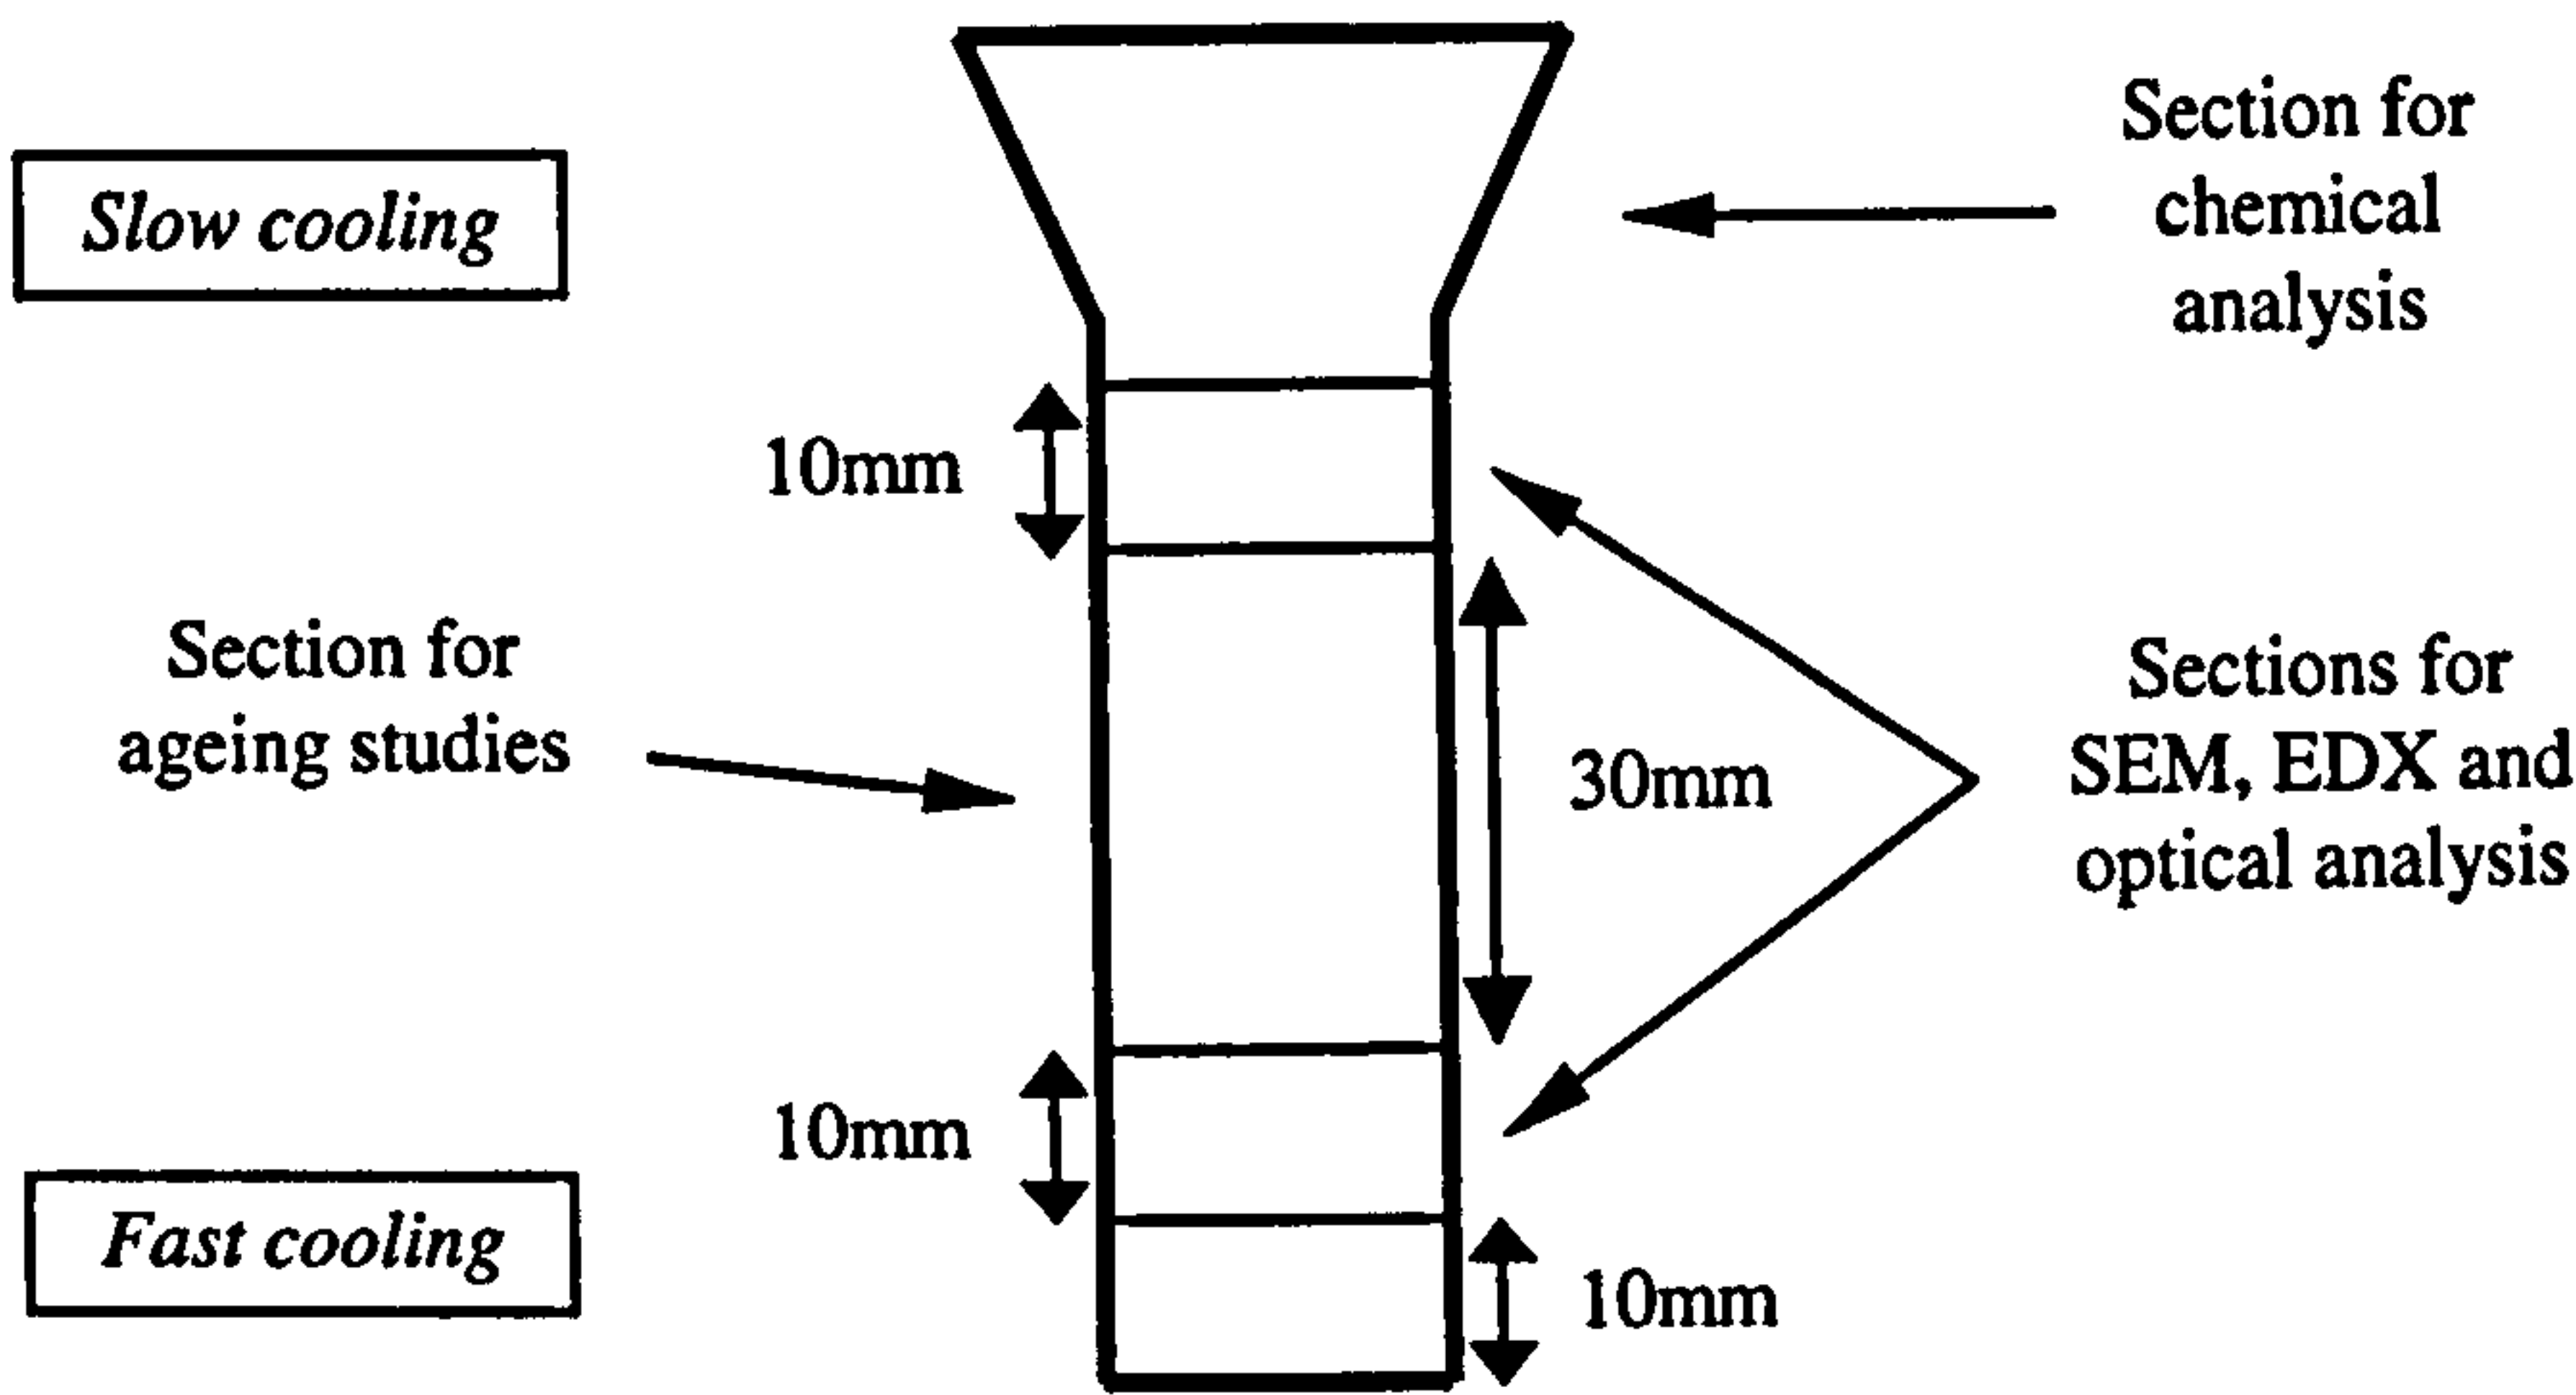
Cross-section of cylindrical mould casting, model alloys 5, 7 to 11
